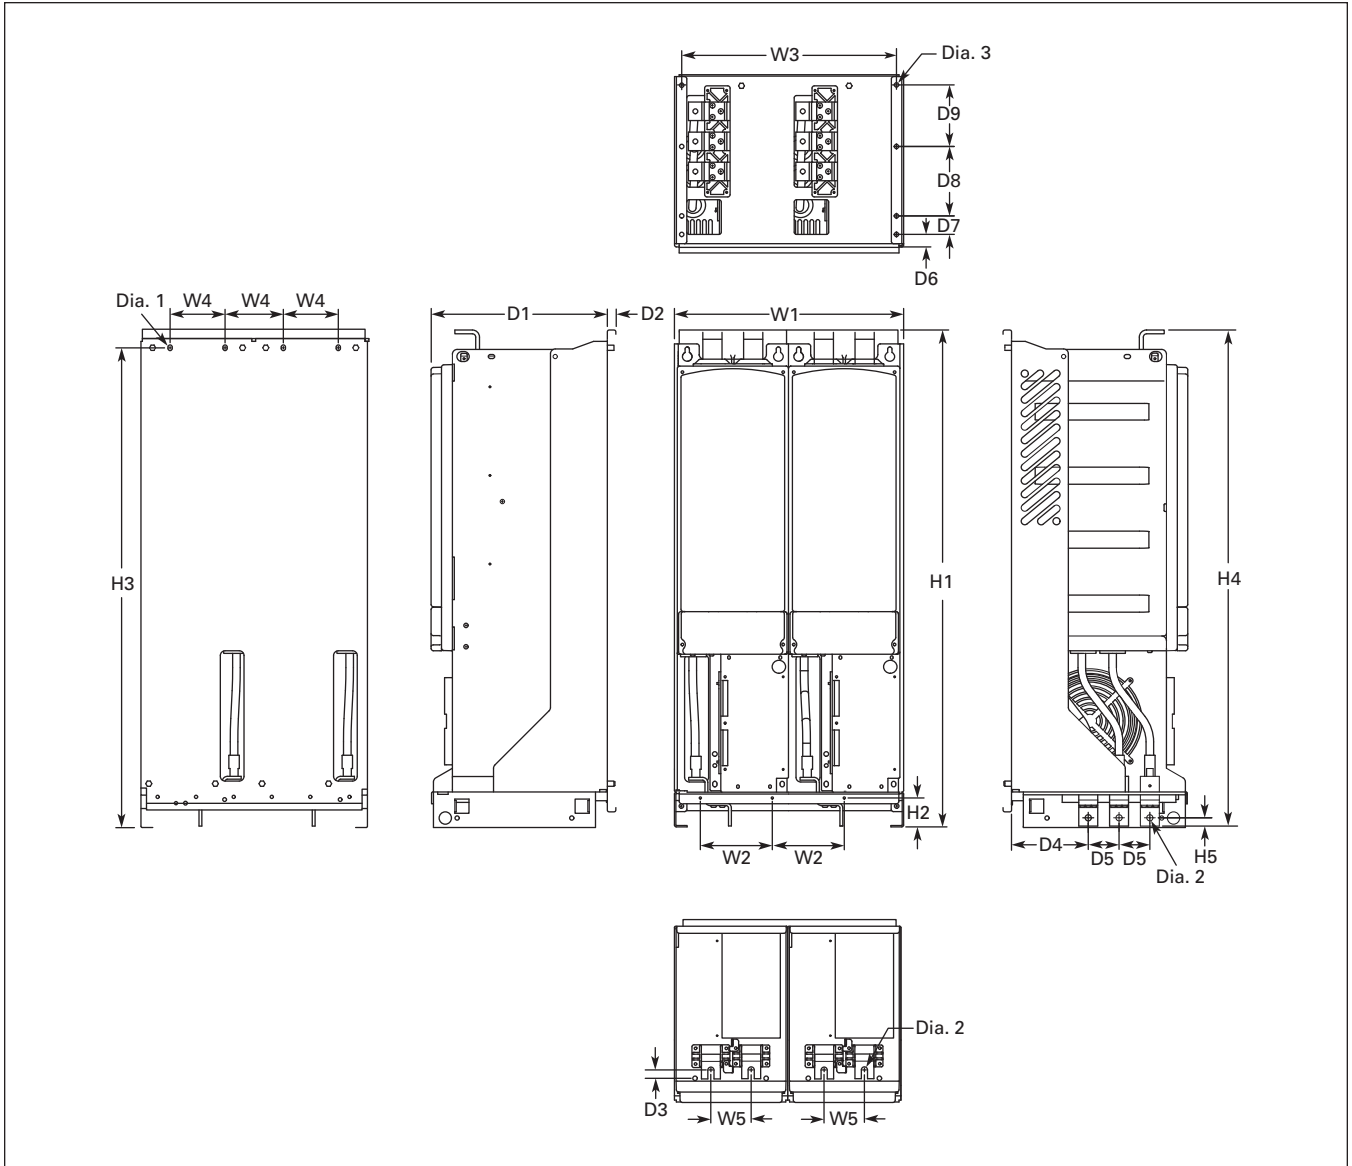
SPX9000 Dimensions, FR13 Open Chassis Converter
